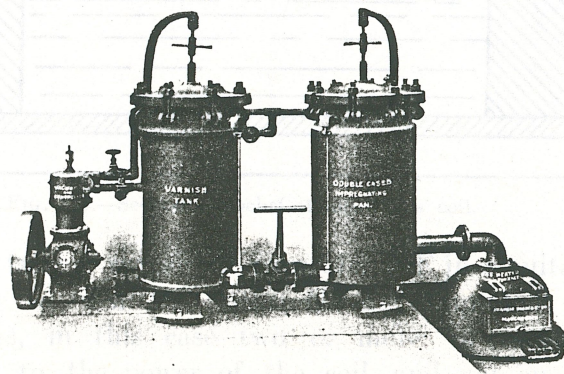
Vacuum impregnating apparatus, showing vacuum pan, compound tank, heating stove and vacuum pump.
